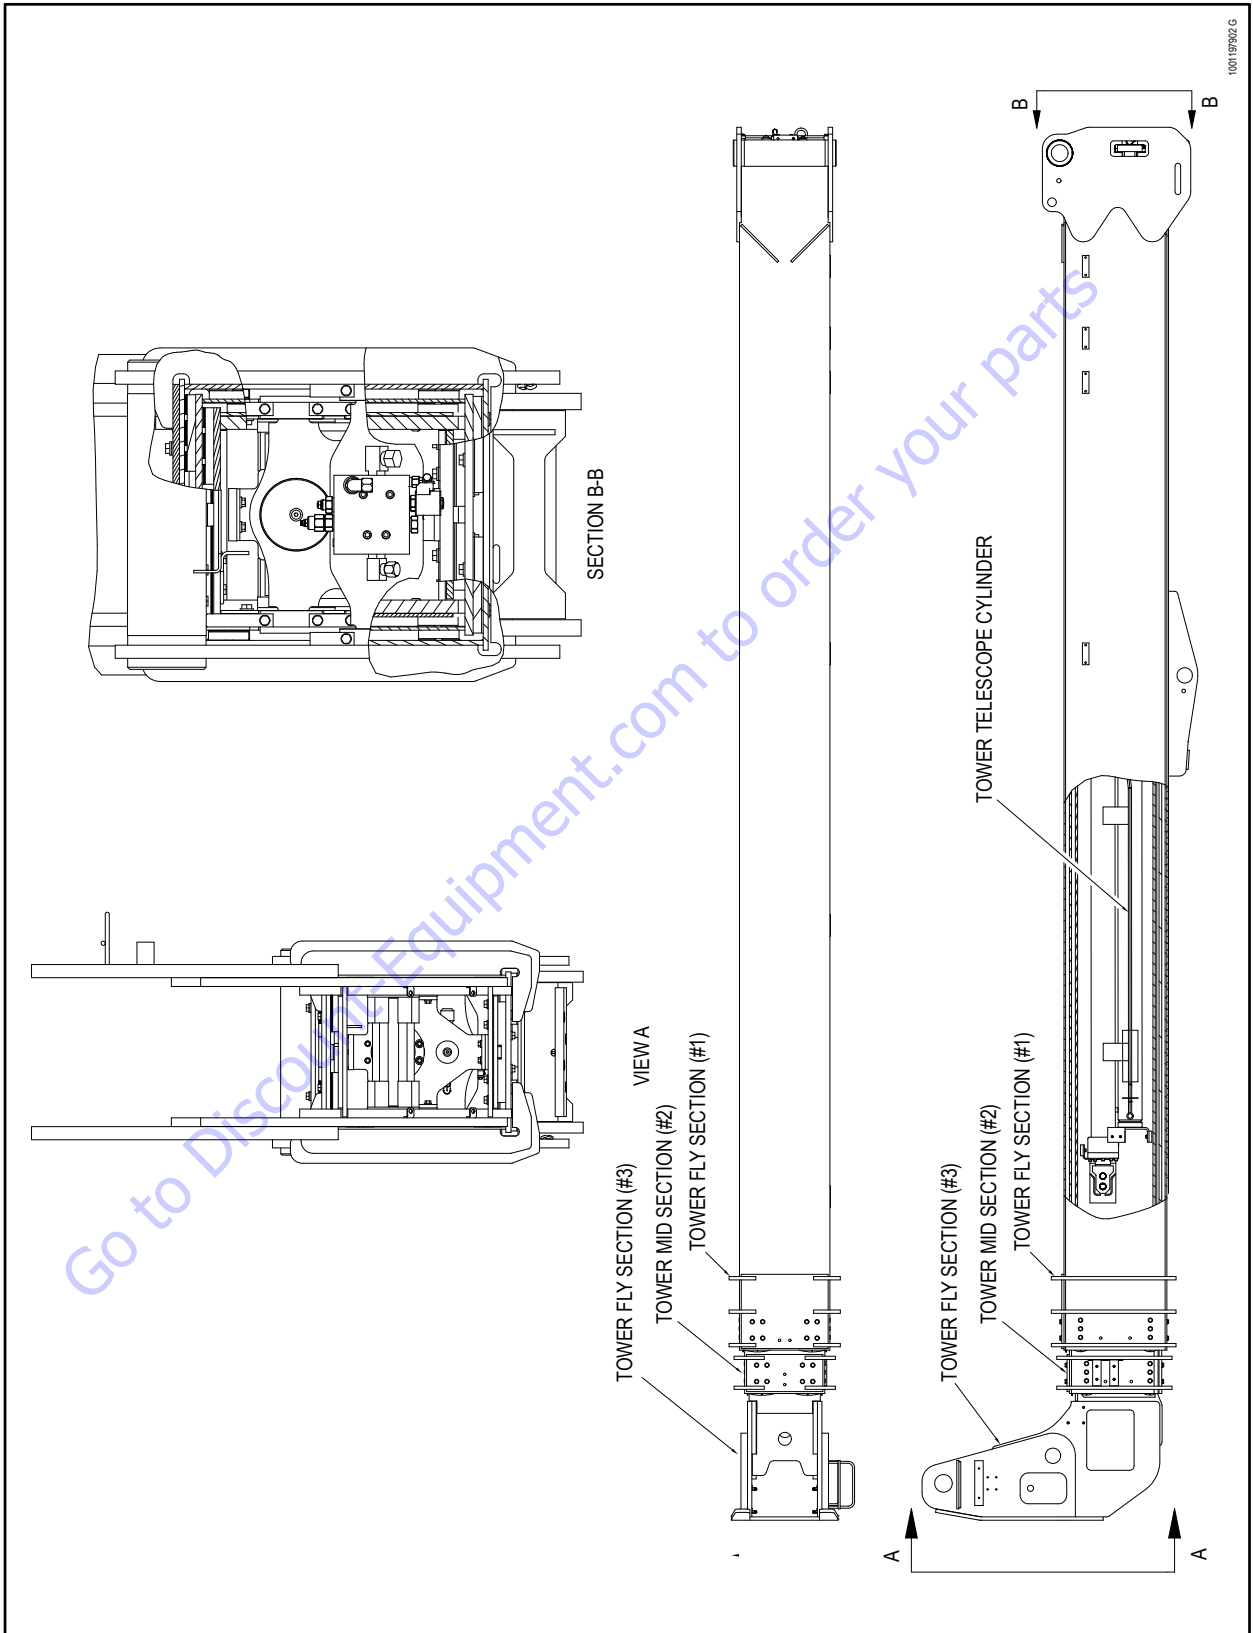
Tower Boom Assembly - Sheet 1 of 6
